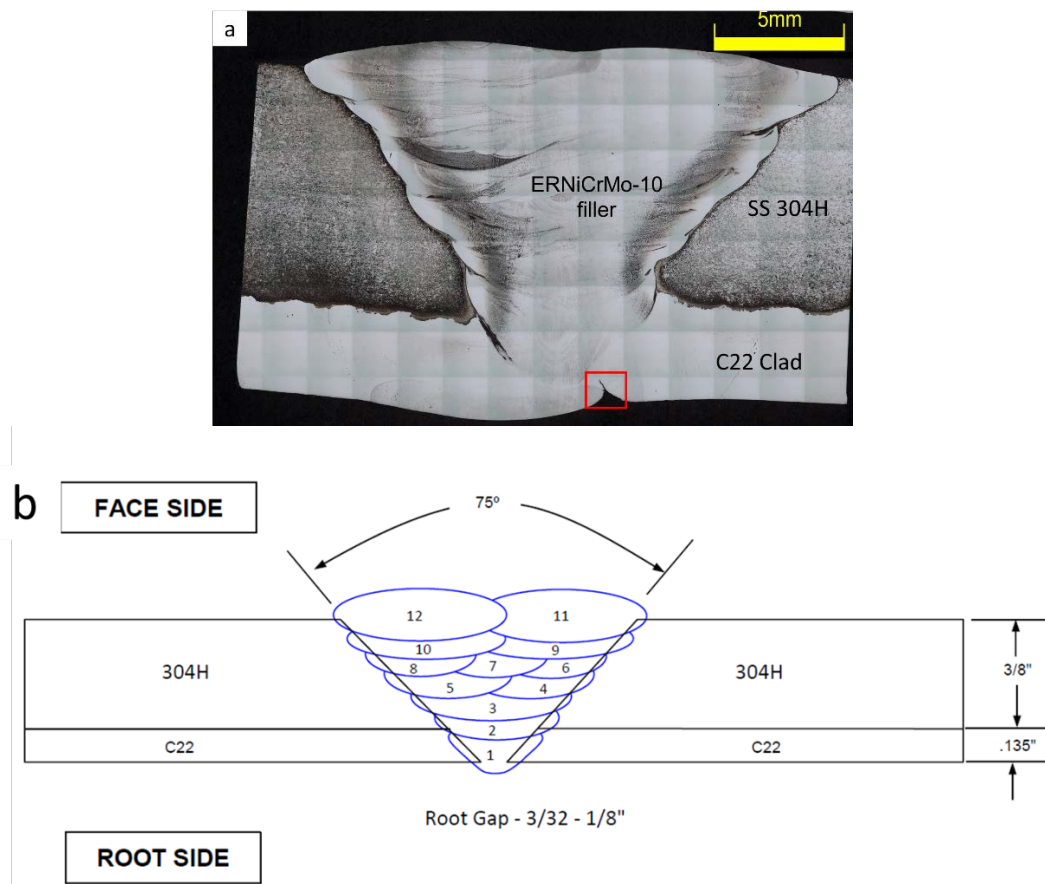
(a) Weld transverse cross sectional macrograph of the butt-joint (girth weld) of SS304H/C22 pipe section (sample was extracted from the center of the weld circumference). (b) Weld design schematic by Enerfab
